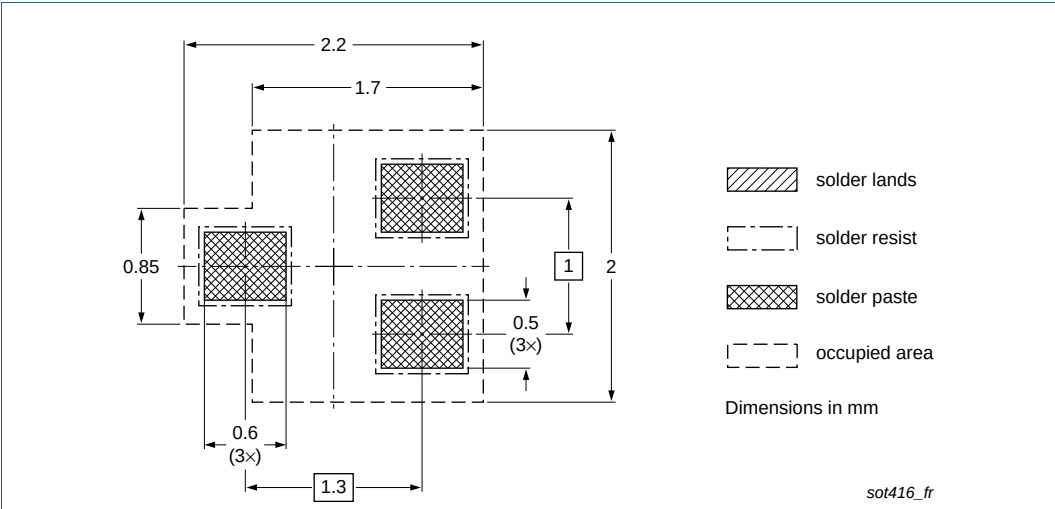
Reflow soldering footprint SOT416 (SC-75)
